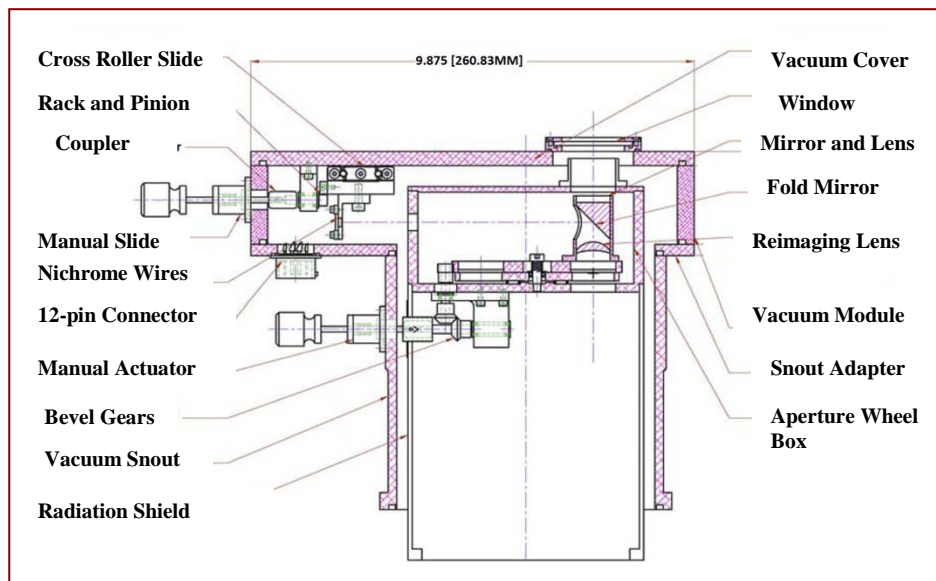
Mechanical drawing of nichrome wire source to be mounted at the OTB front end showing wire selection mechanism, fold mirror and reimaging lens.
